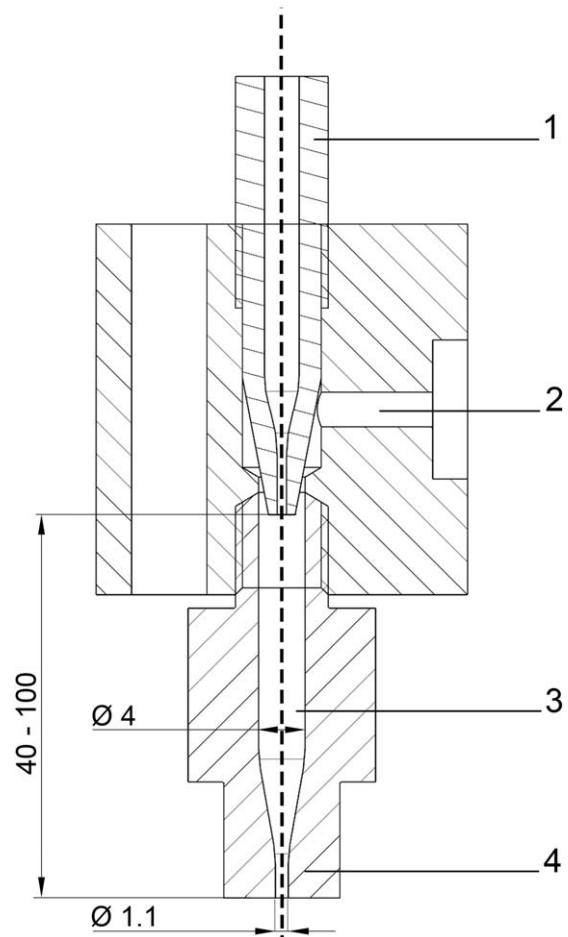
Regular pultrusion melt impregnation device, dimensions in mm.
